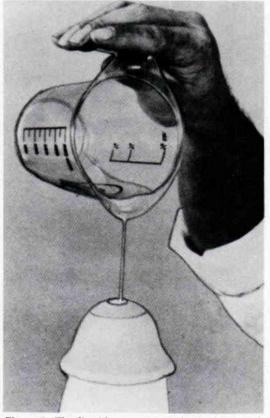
The liquid component mixture is poured into the opening at the top of the distal pad mold.
